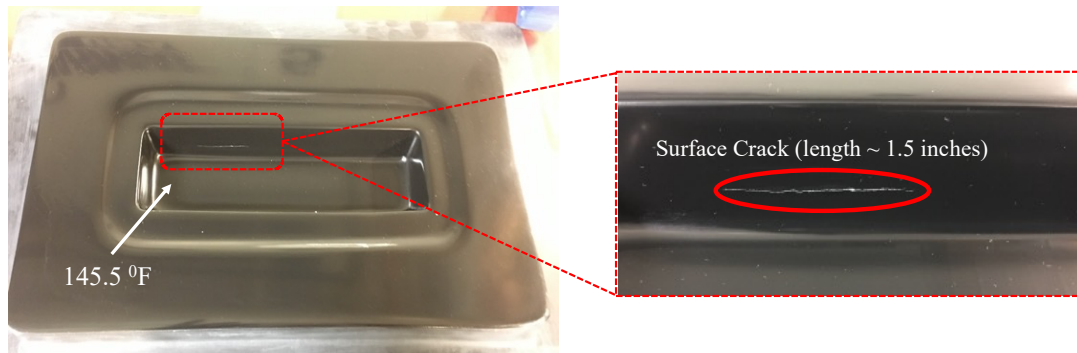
AM tool with relatively small surface crack after 15-20 parts molded under compression molding
